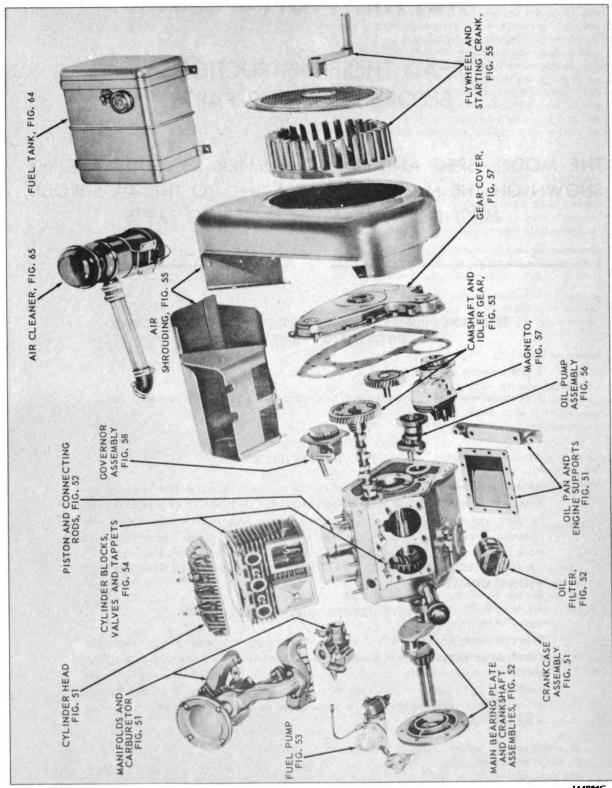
, EXPLODED VIEW OF ENGINE Refer to figure numbers for break down of parts.
